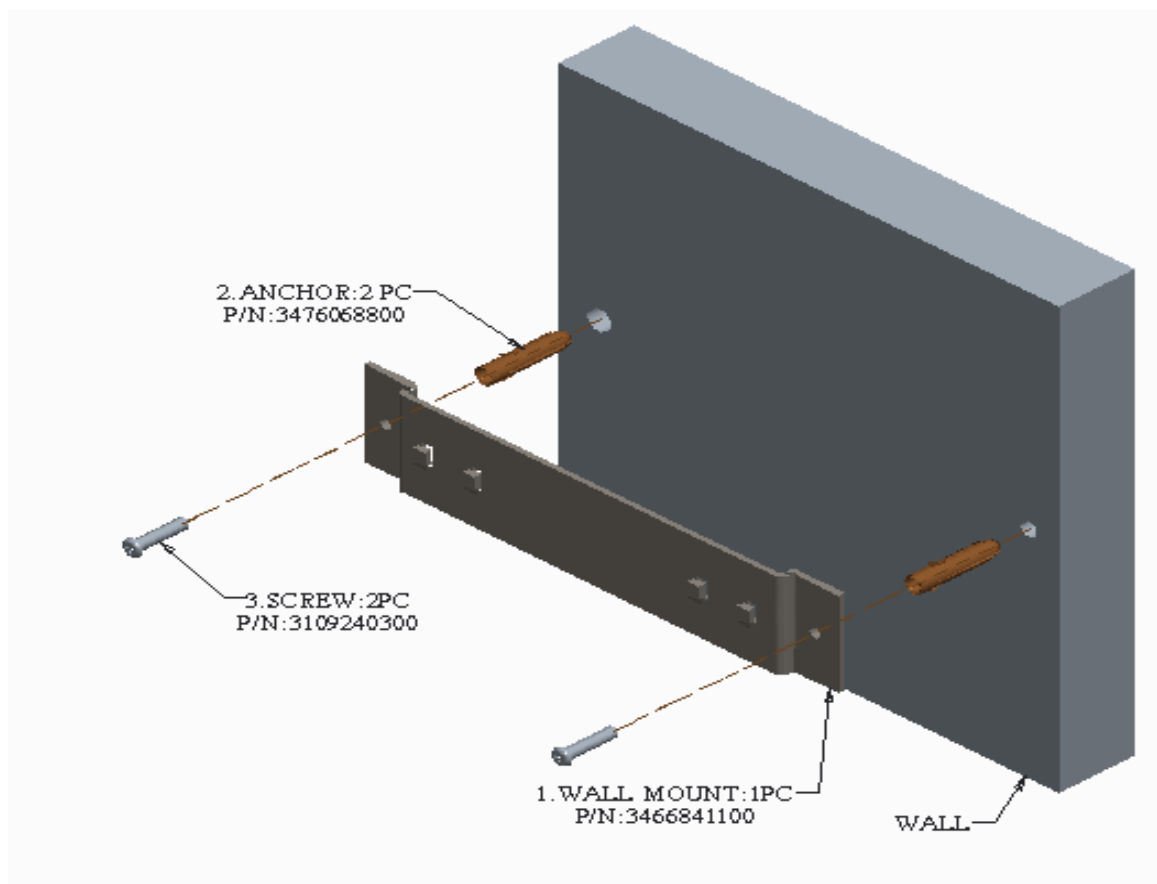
DeIREMO-V2.0 Wall Mounting Plate
